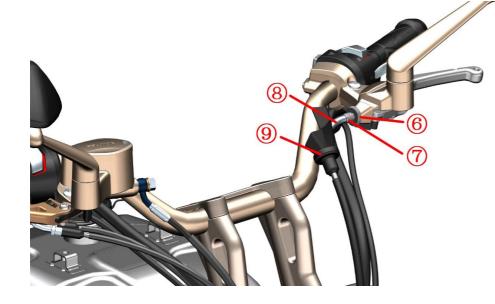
FRONT FORK COMPONENT		clutch cable replacement	CHK	Q
